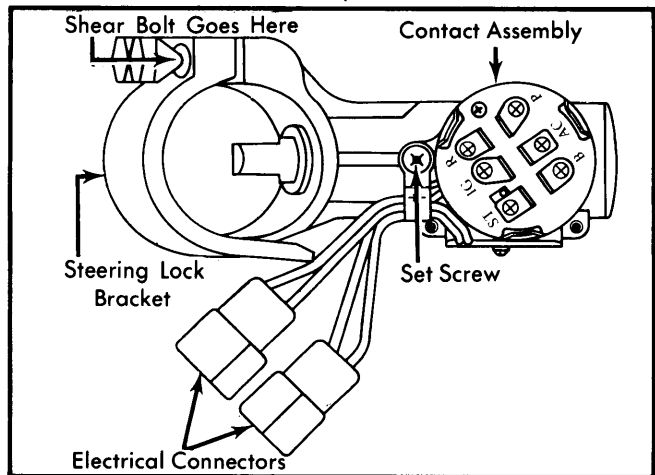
RX4 and Cosmo Ignition Switch Contact Housing
